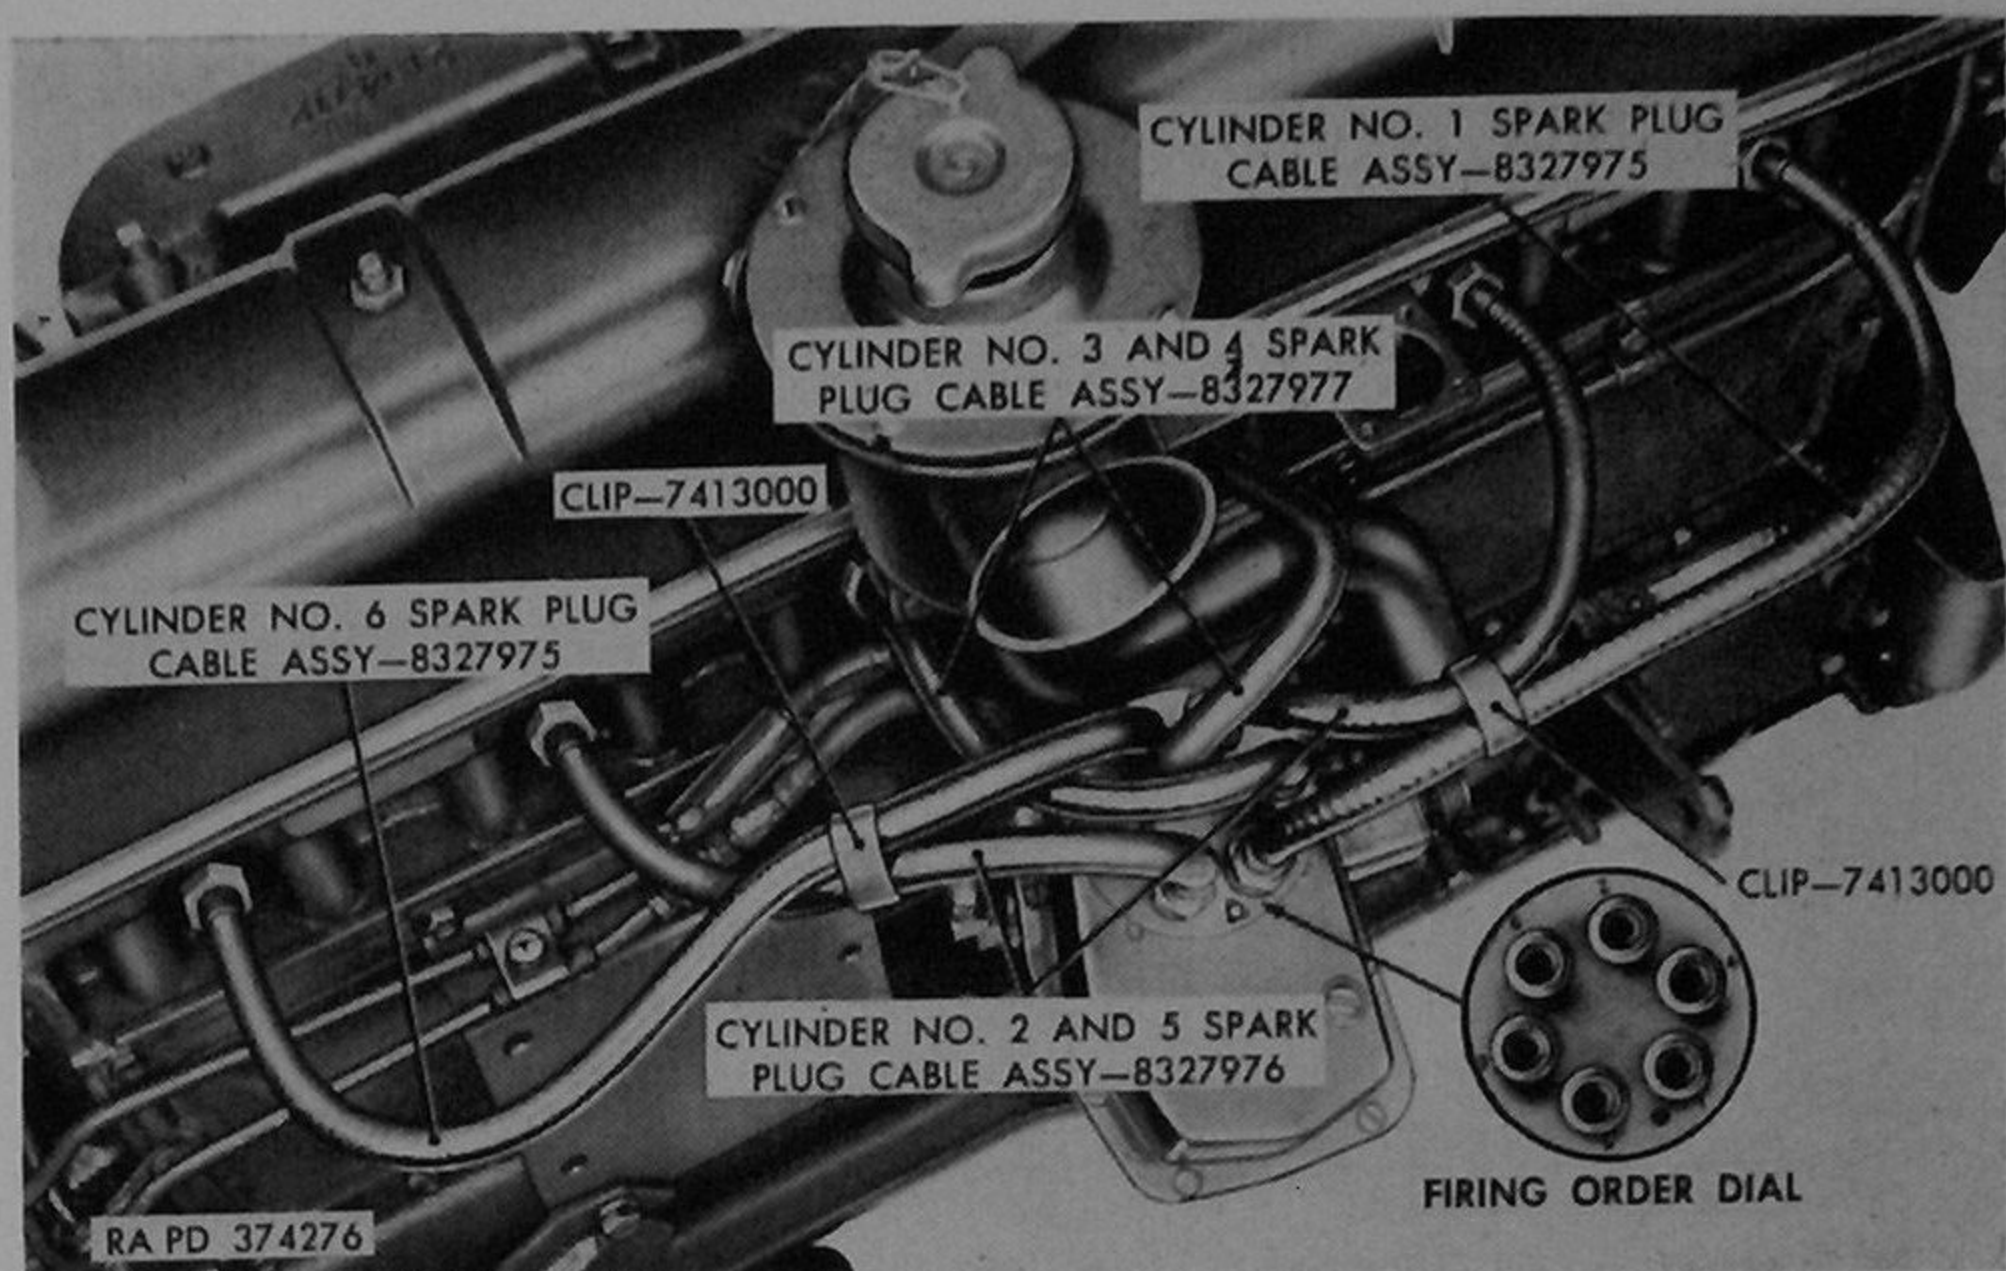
Spark plug cables installed—engine assembly 8726920 shown.
